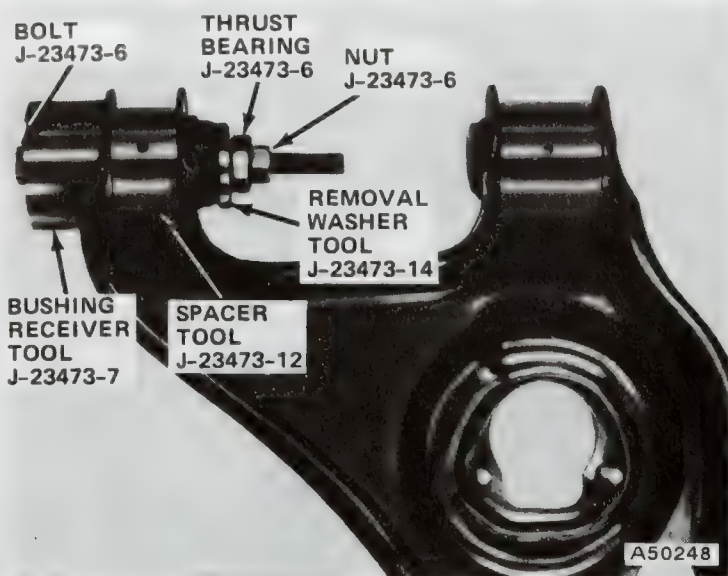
M-44 Lower Control Arm Rear Bushing Removal
